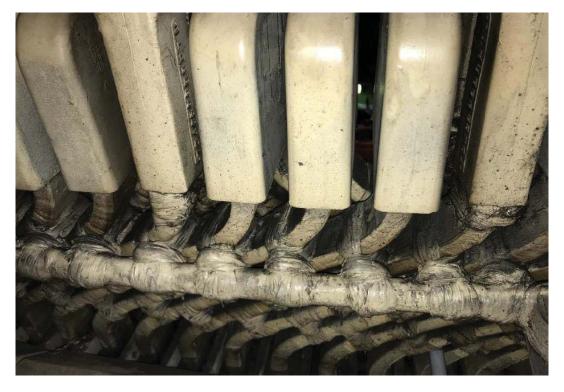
Stator Windings: Typical Top End View of the Windings
